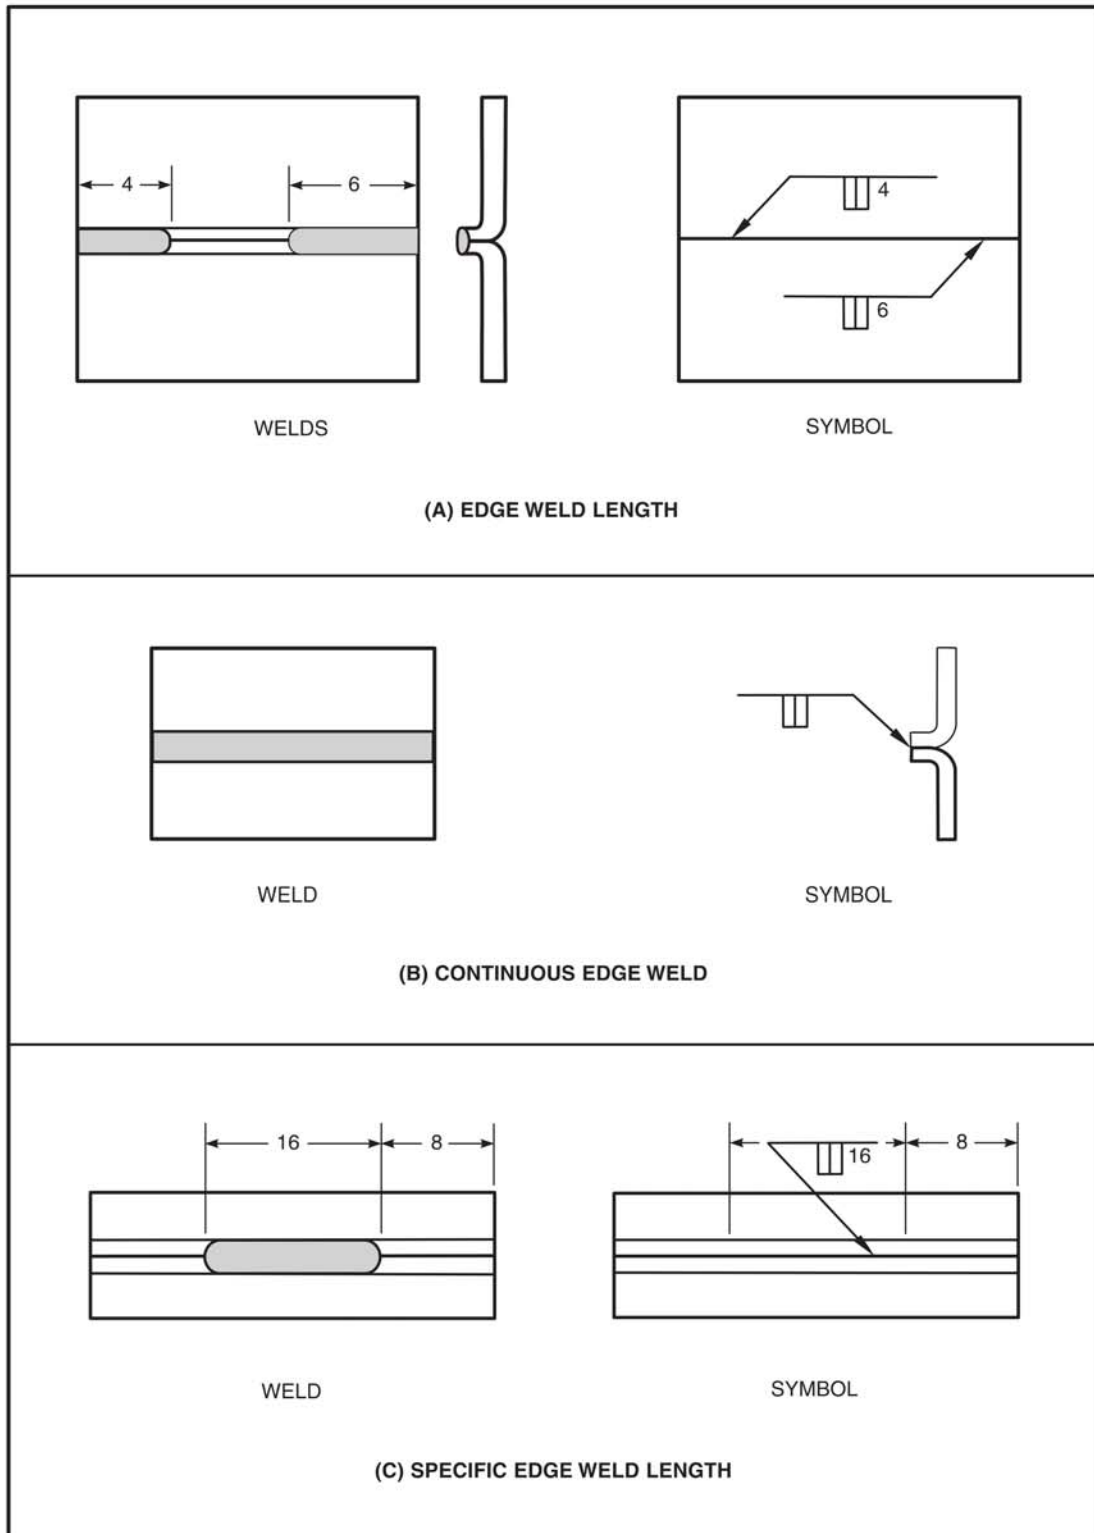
Application of the Length of Welding of Edge Welds
